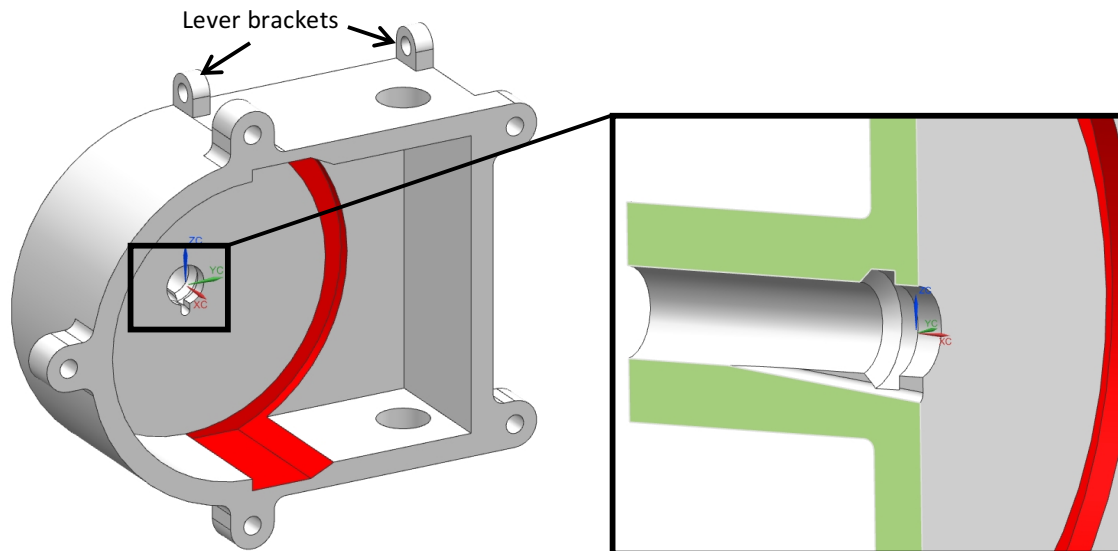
Main housing (left), zoomed section view of shaft entrance (right).
